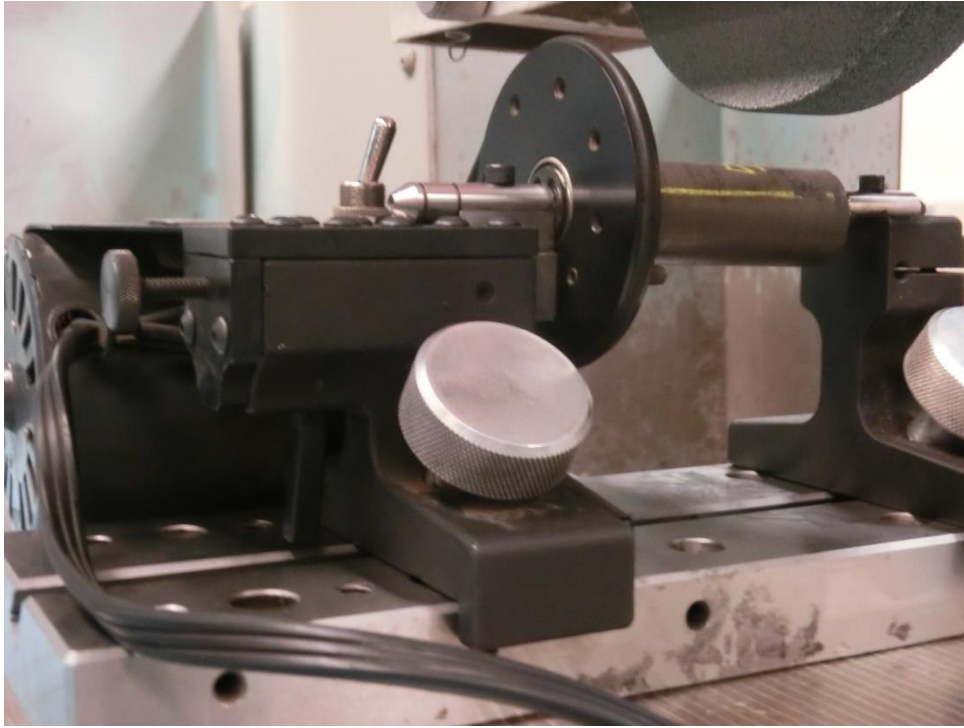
Fixture device and grinding machine used to polish sample to cylinder
